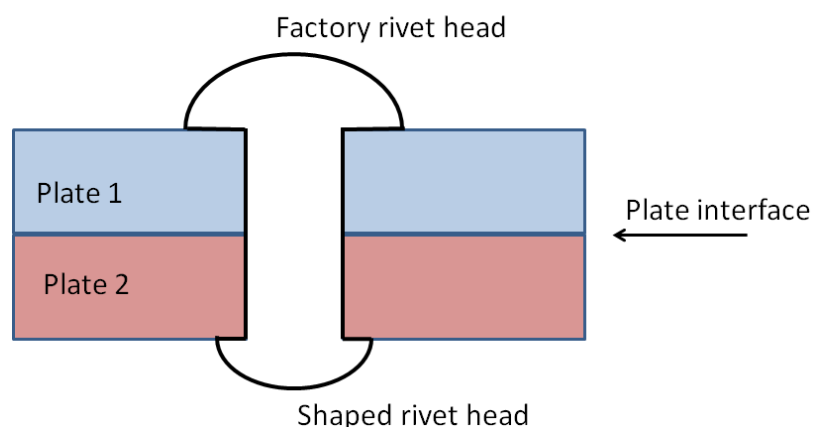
Riveted joint terms after riveting, step 5 in the riveting process.
